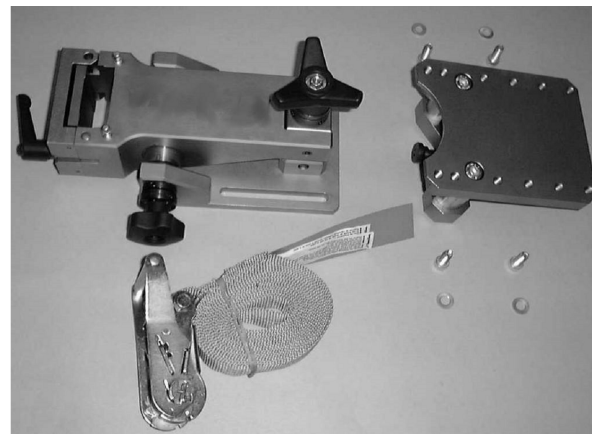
COMPONENTS FOR COLLAR BAND MOUNTING
